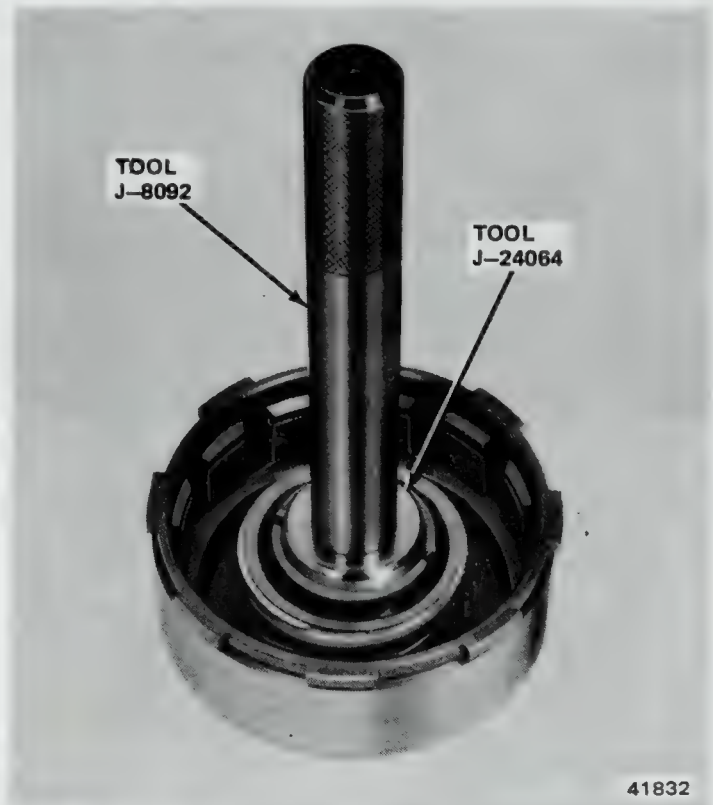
C-76 Clutch Retainer Bushing Installation—Models 904-998
